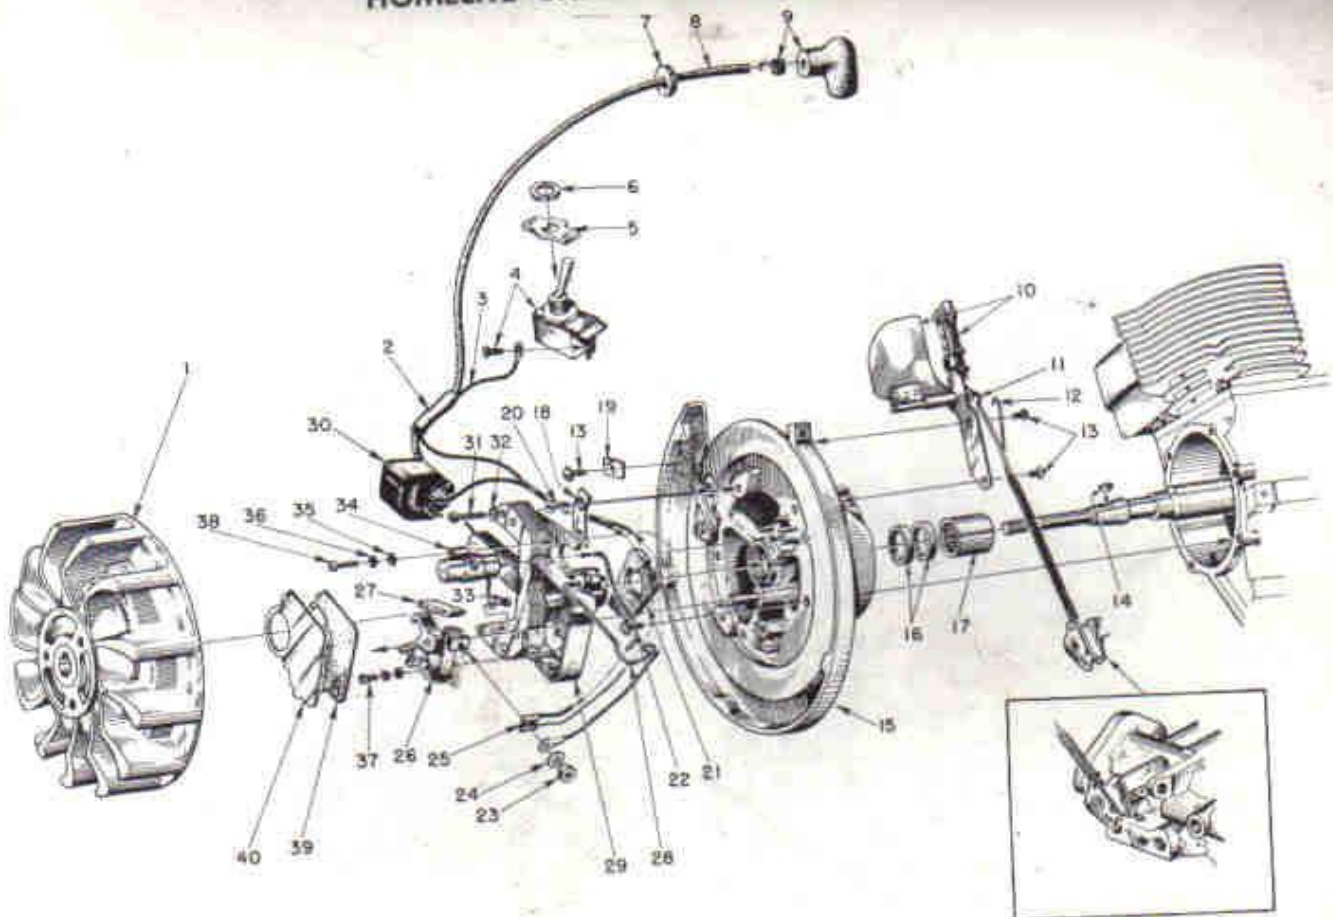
PHELON IGNITION AND GOVERNOR PARTS
